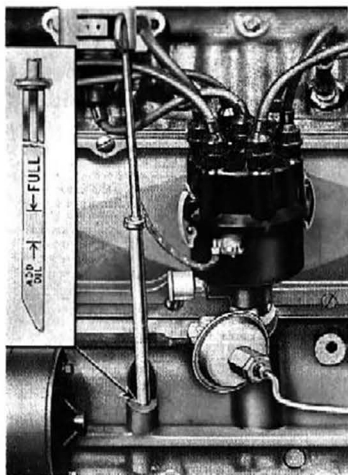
Oil Gauge Rod—6 Cyl. Engine
